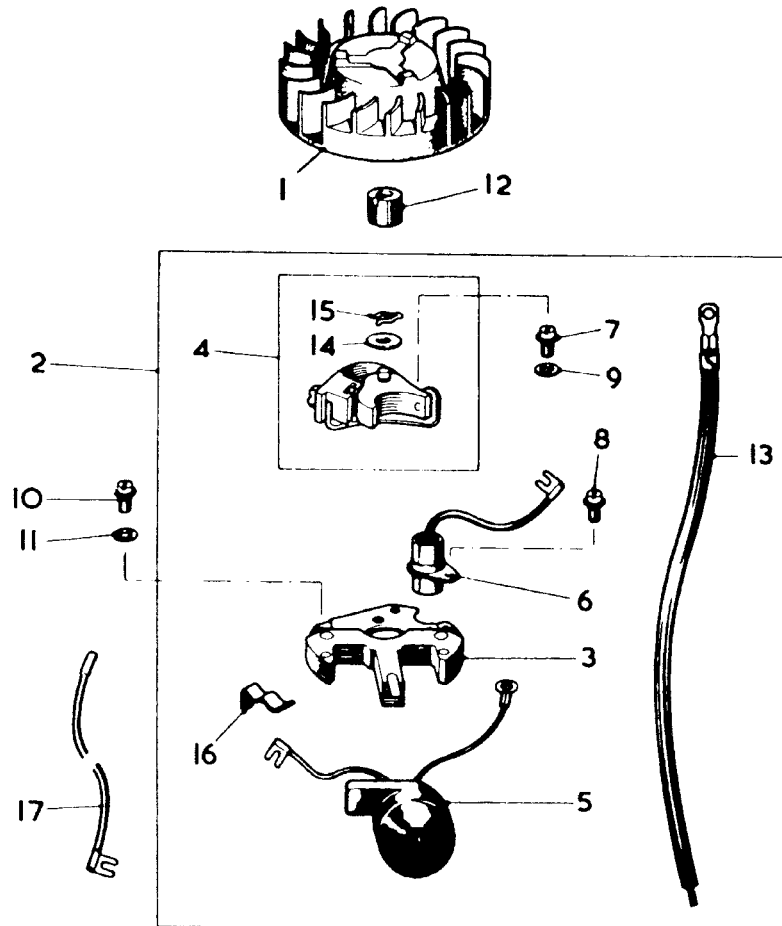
DISMANTLED VIEW OF MAGNETO ASSEMBLY
